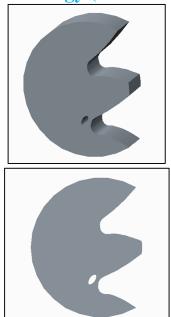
Isometric view and Front view of 3-D asymmetric gear with hole in 3rd trial.
